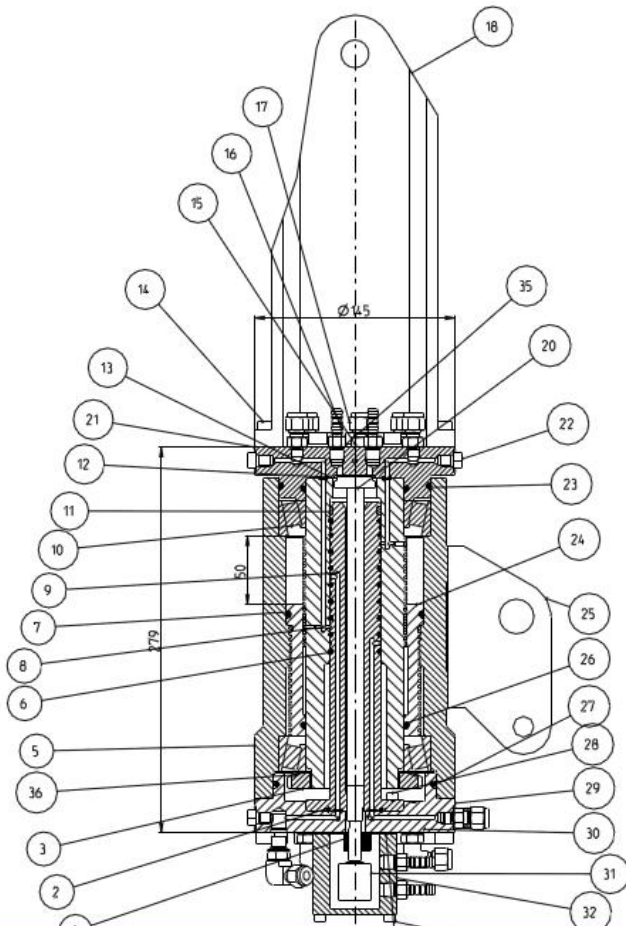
Structure of hollow axis swing cylinder based on double screw pairs
